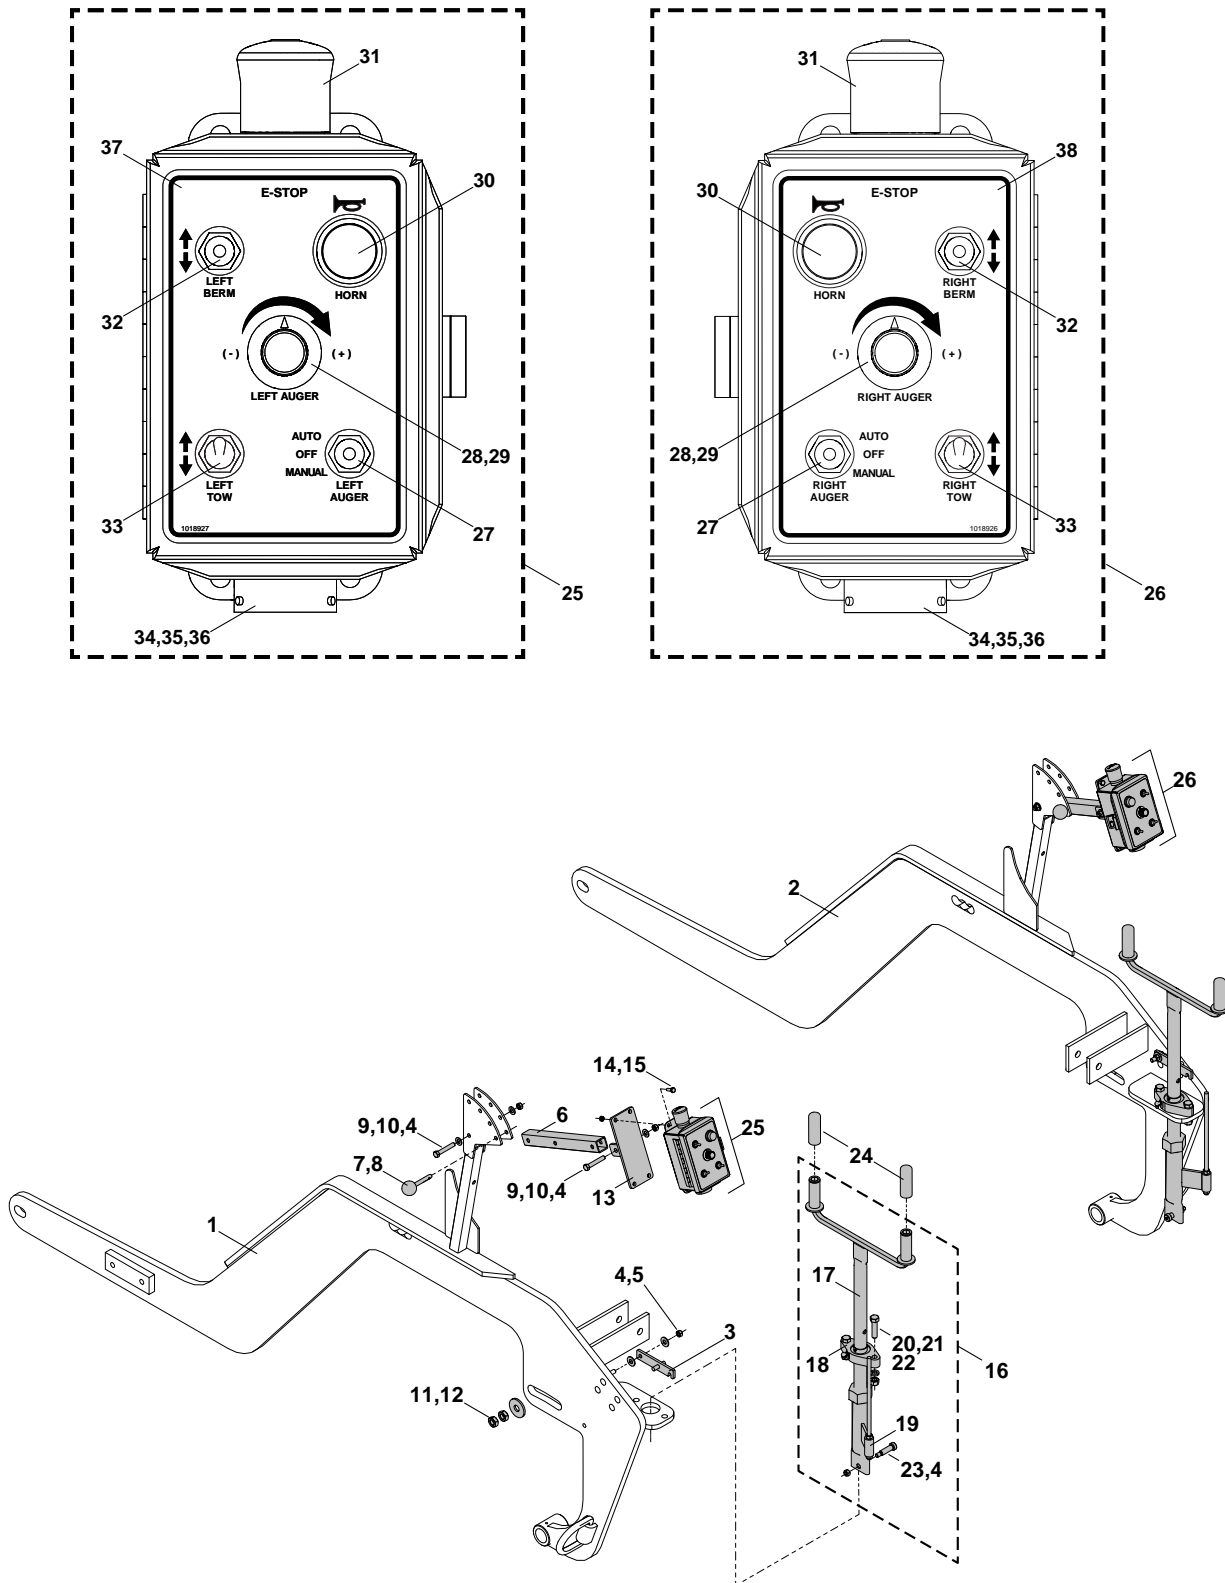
Option - Legend Screed Pull Arm Assembly - Left/Right
